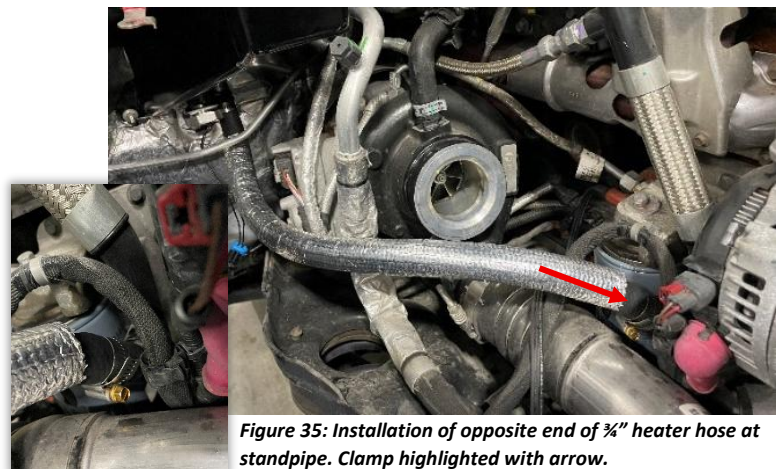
Installation of opposite end of 3/4" heater hose at standpipe. Clamp highlighted with arrow.
